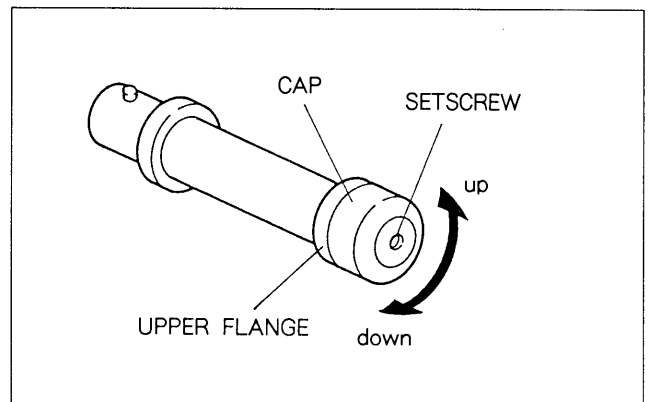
Taper Guide and Guide Post 3 Height Adjustment
